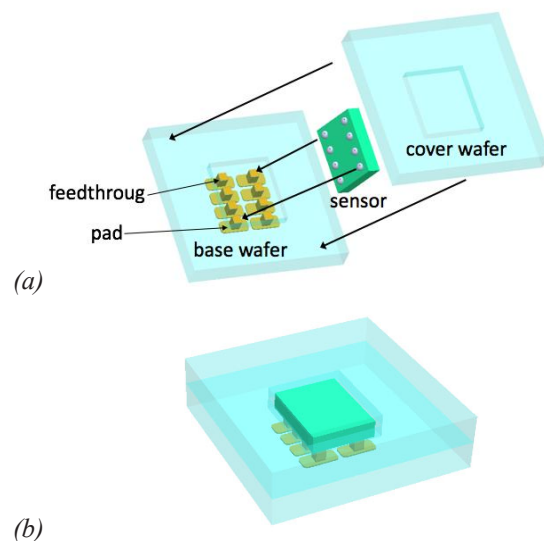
Schematic of package (a) package structure, (b) ensemble view.
